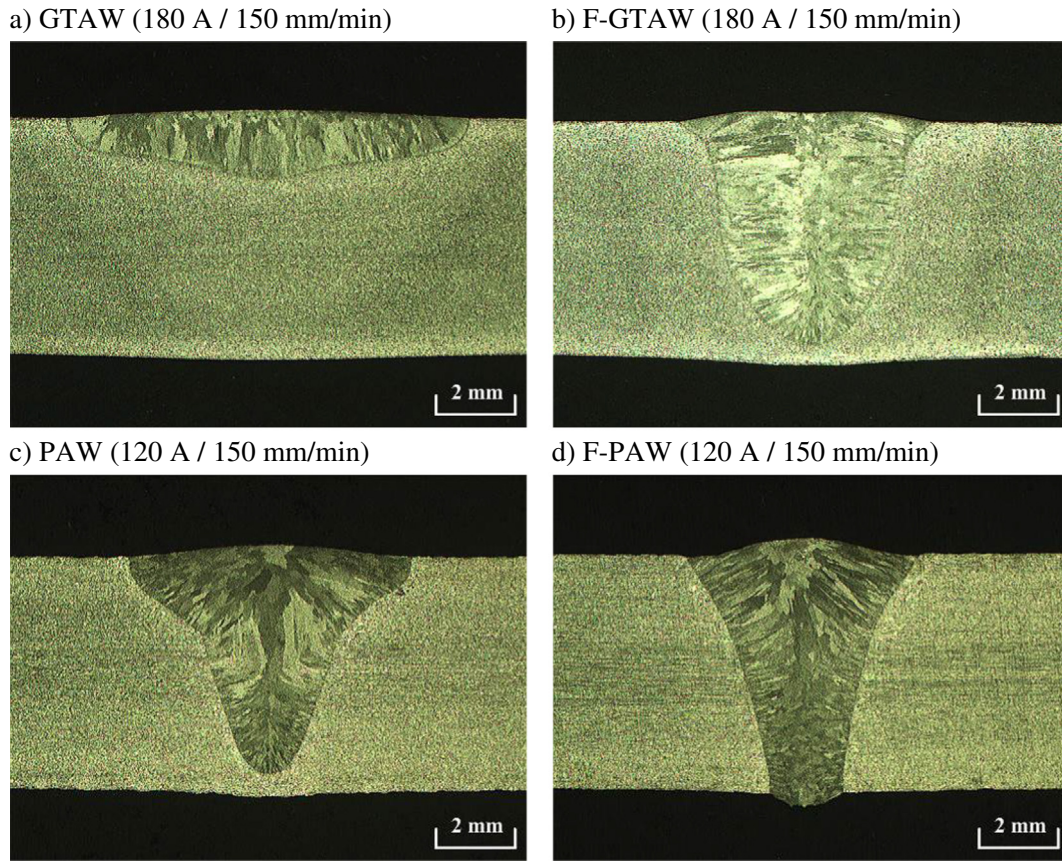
Weld cross-sectional profiles made with and without flux.
